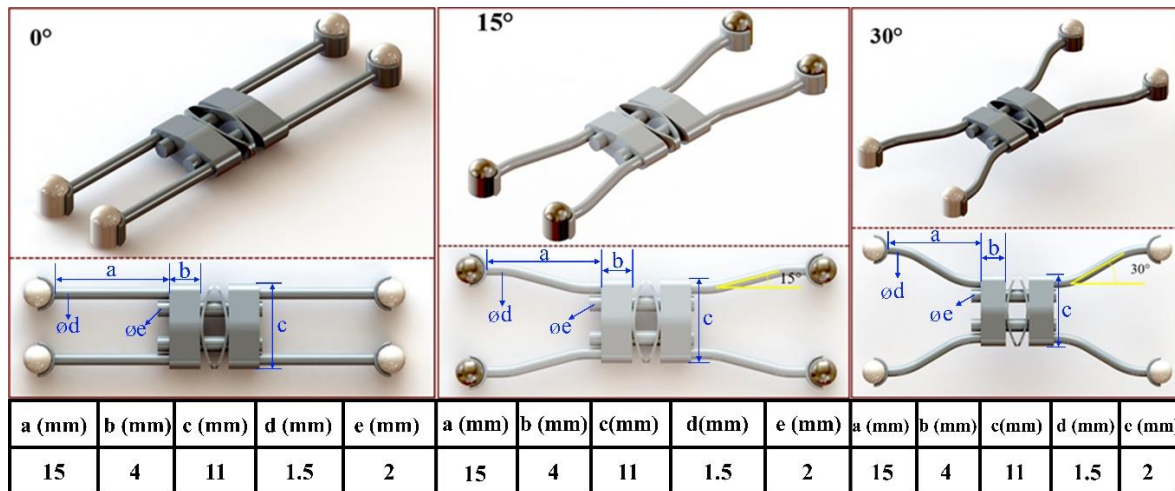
The geometries and dimensions of maxillary expander with 0°, 15° and 30° arm angle.
